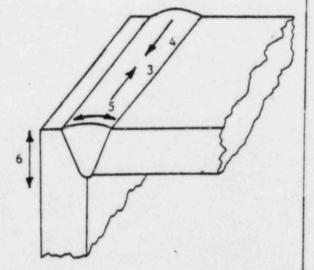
EXAMPLE OF WELD AREA SCANNING
